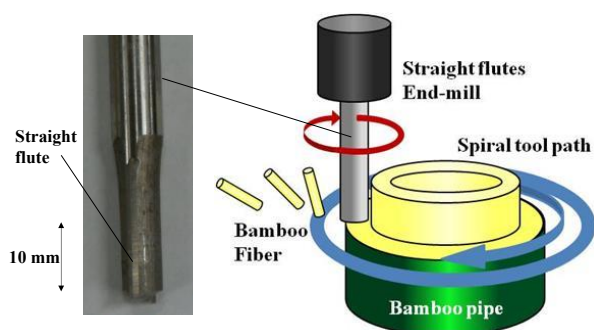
Spiral tool path for extracting fine bamboo fibers with a machining center.
